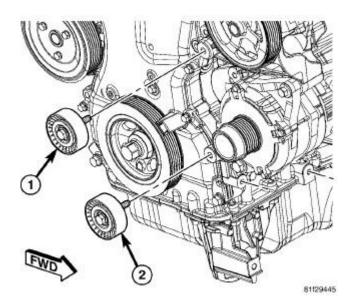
Removing/Installing Accessory Drive Belt Upper & Lower Idler Pulley Courtesy of CHRYSLER GROUP, LLC
